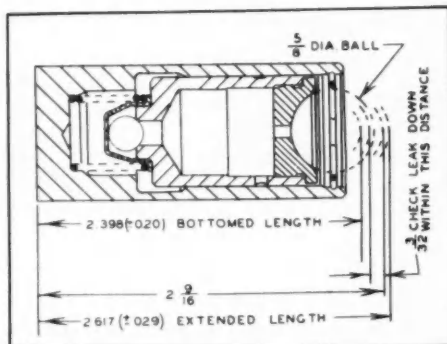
Cross-section of the cast iron body type valve lifter for Buick engines.
